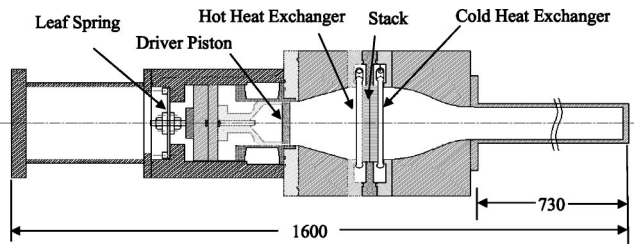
Schematic of the standing wave thermoacoustic cooler (dimensions in millimeters).
